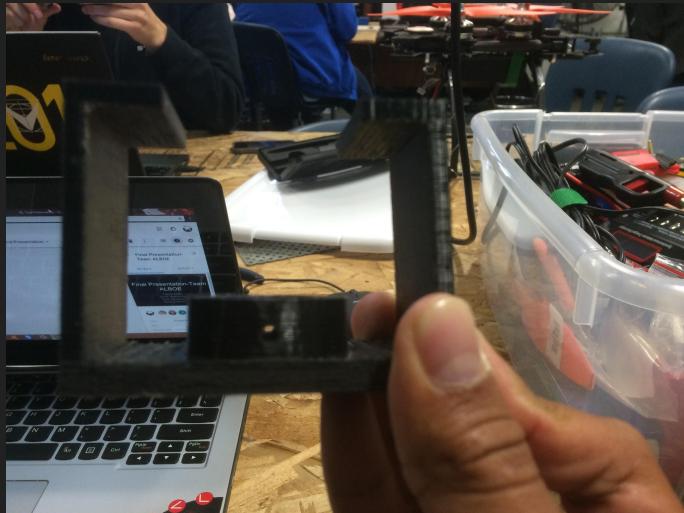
3D Printed Electromagnet Holder-Mk 3-Side View
